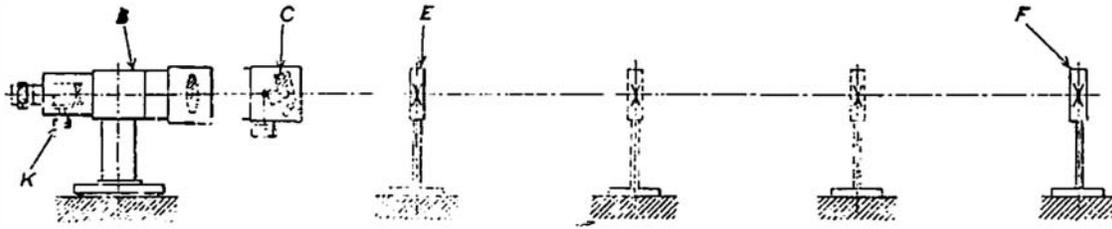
General Arrangement of Optical Alignment Testing Telescope
